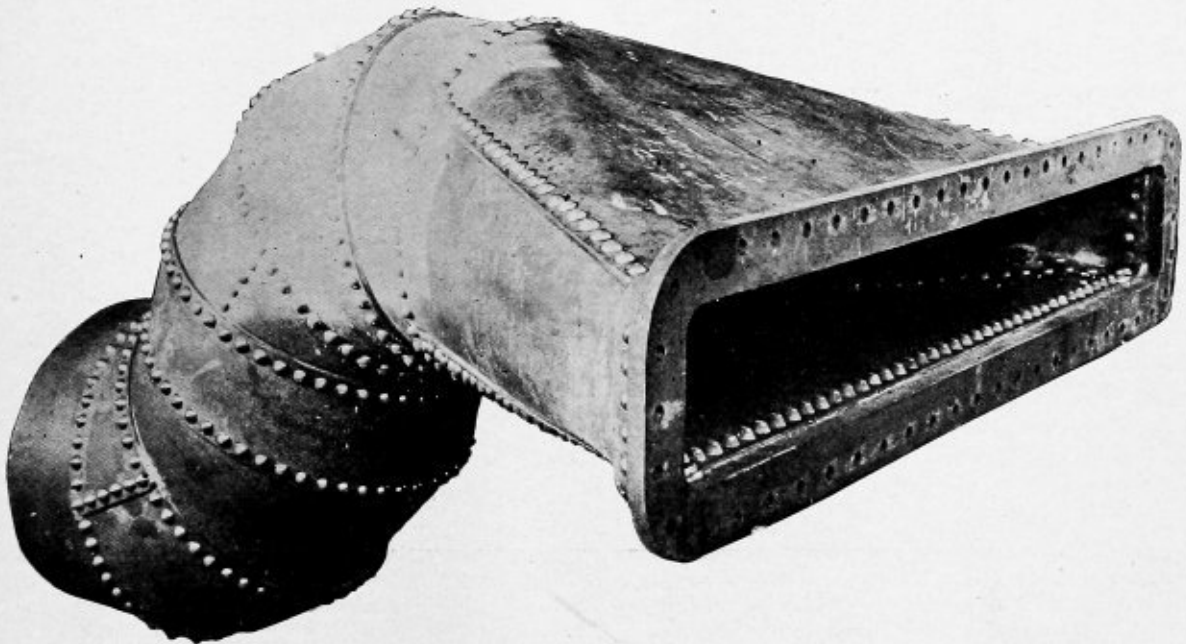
EXHAUST ELBOW RIVETED UP AND READY TO SHIP.
